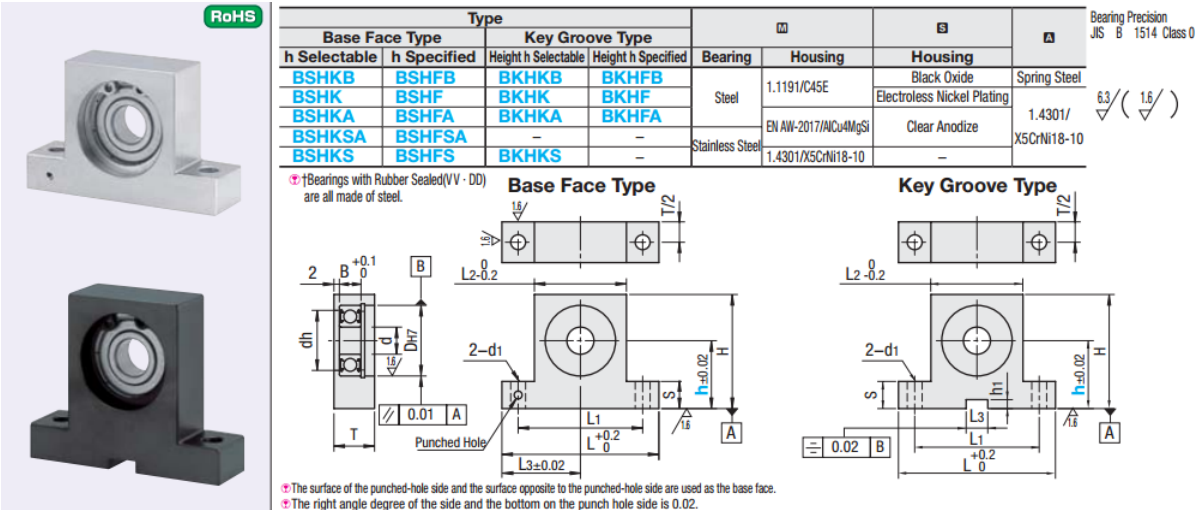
Bearing with its housing for the support of the shaft of the pulley. See Chapter 11.4.
